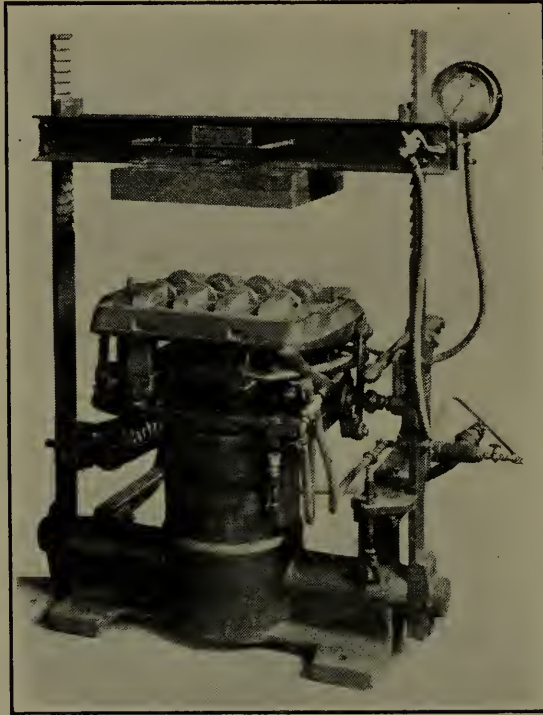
Power Squeezing Split Pattern Molding Machine.
